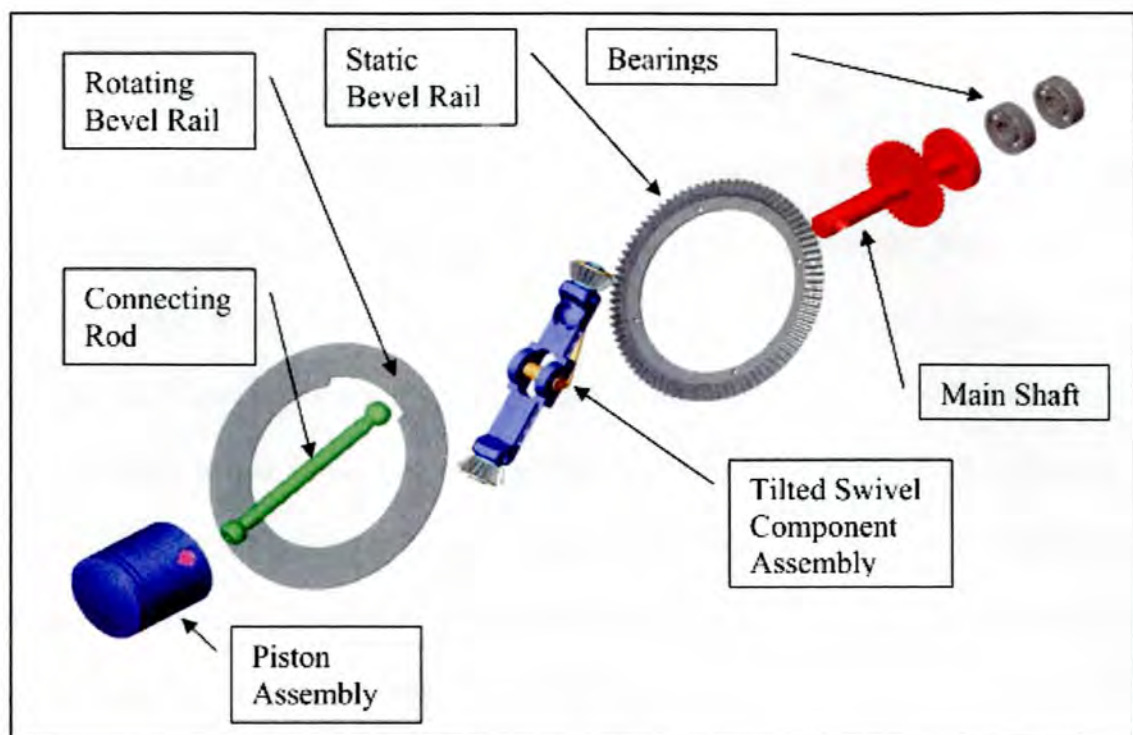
Exploded view of the engine inner components from Shamsudin (2004).
